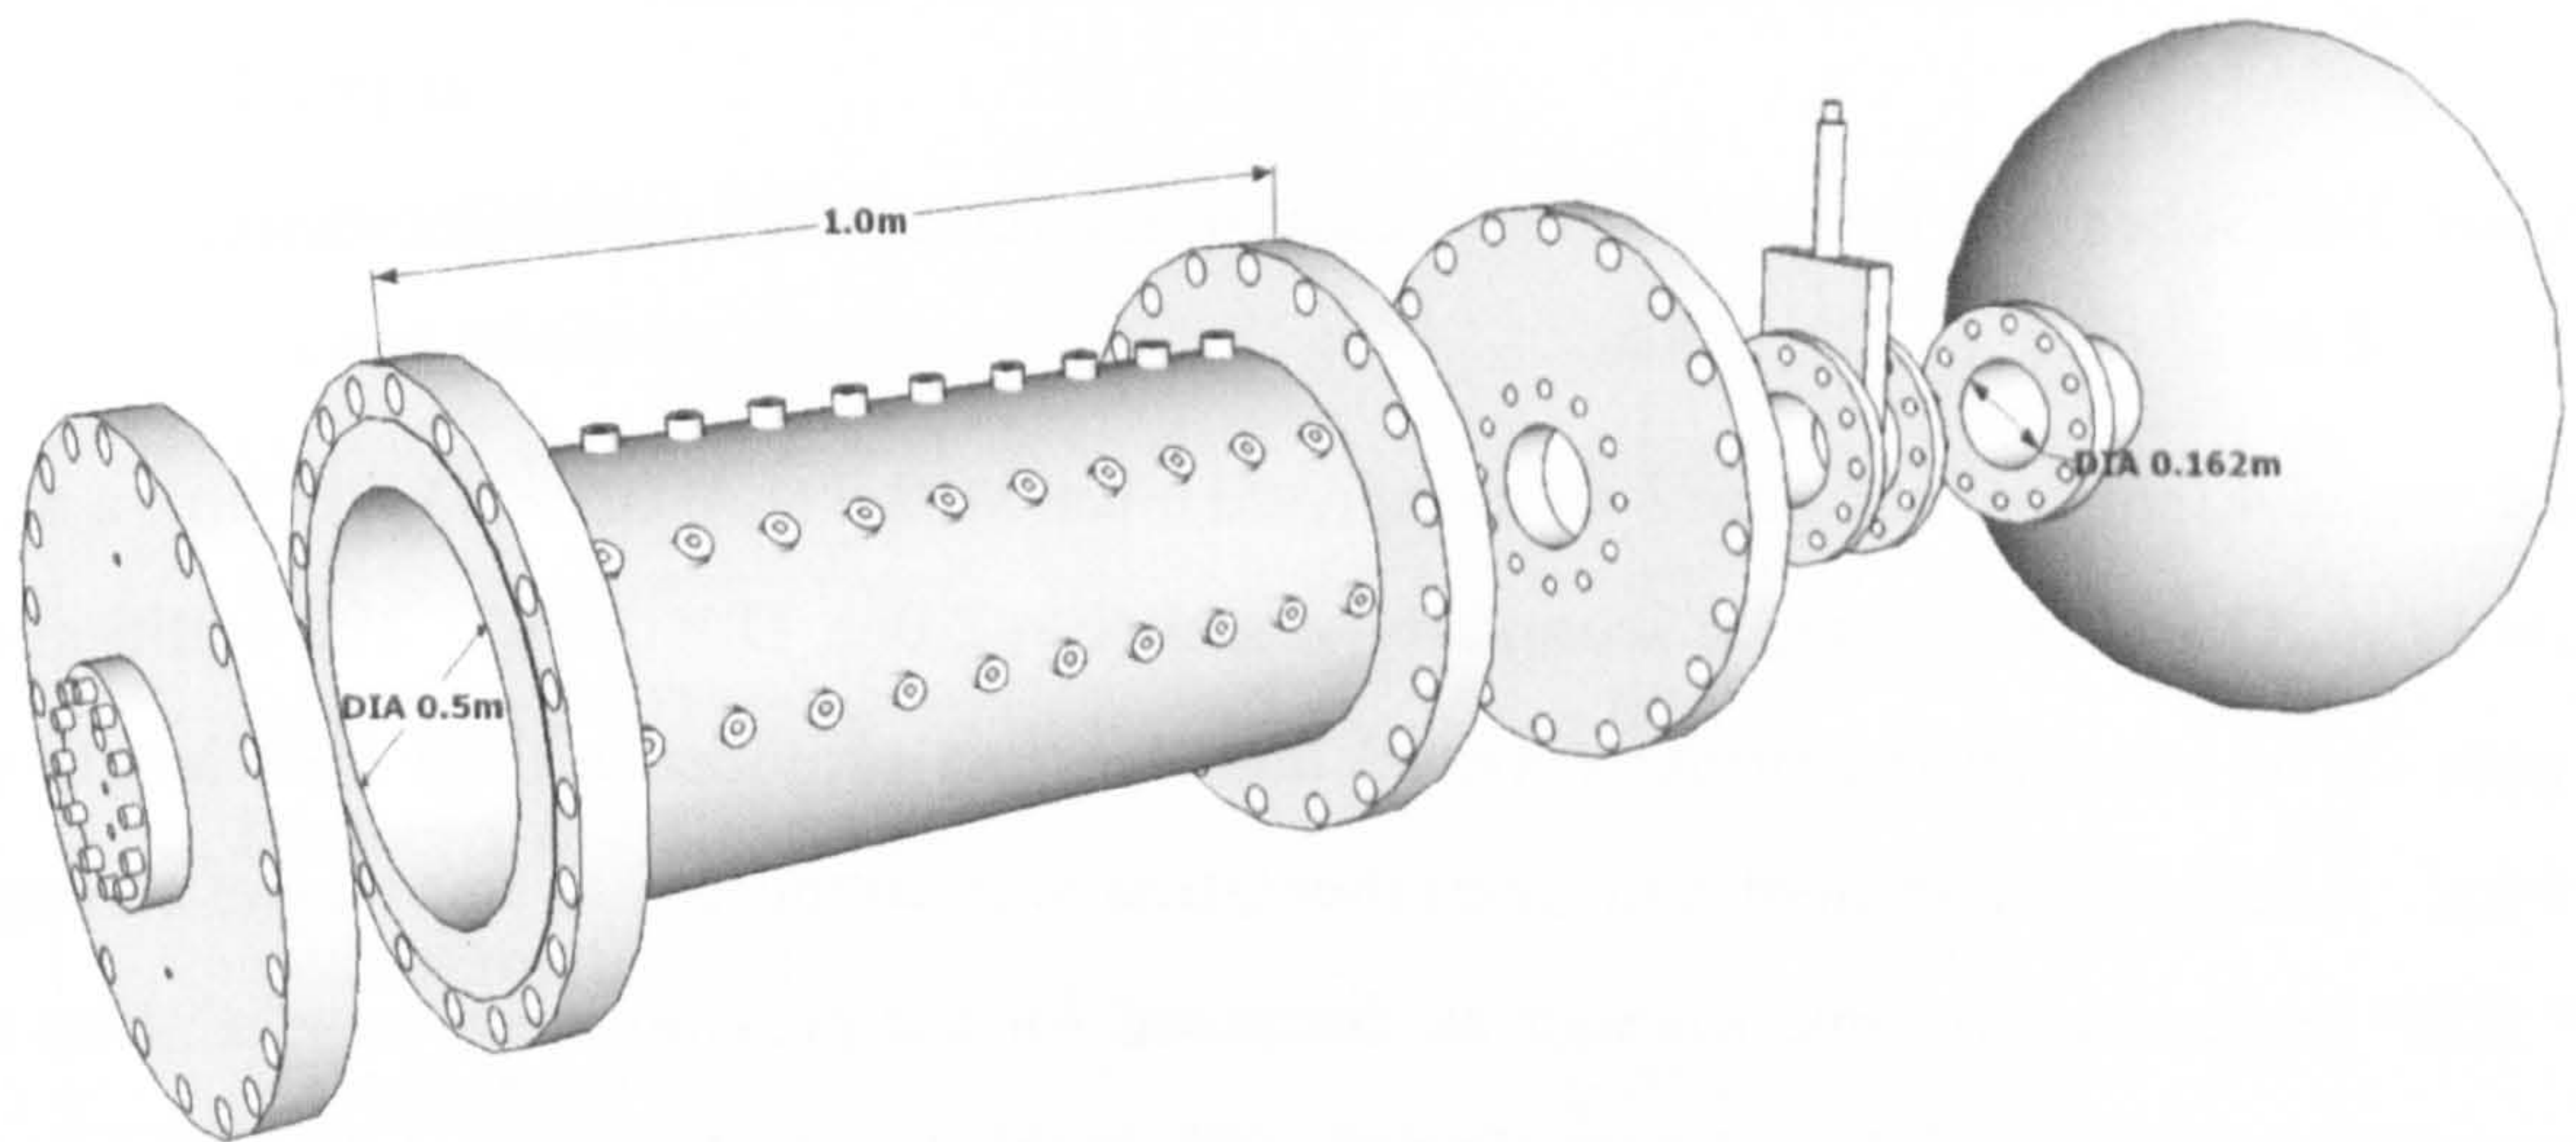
Schematic drawing of test-vessel 2: Vented vessel geometry.
